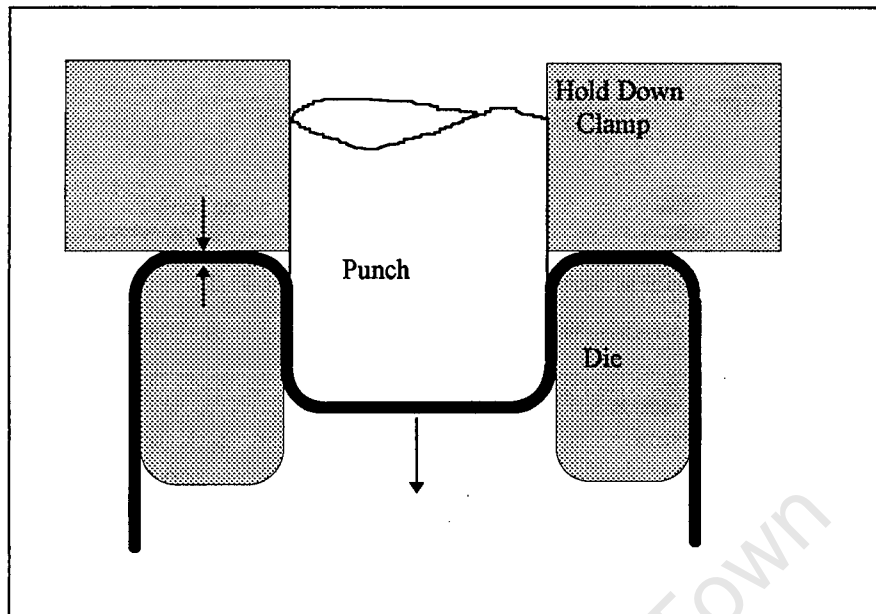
Tool and Blank Set-up for Reverse Redrawing Operation
